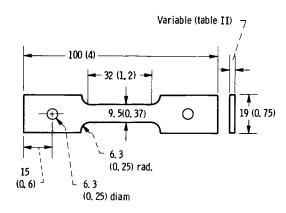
Sheet specimen used in this investigation. (Dimensions are in mm(in.).)
